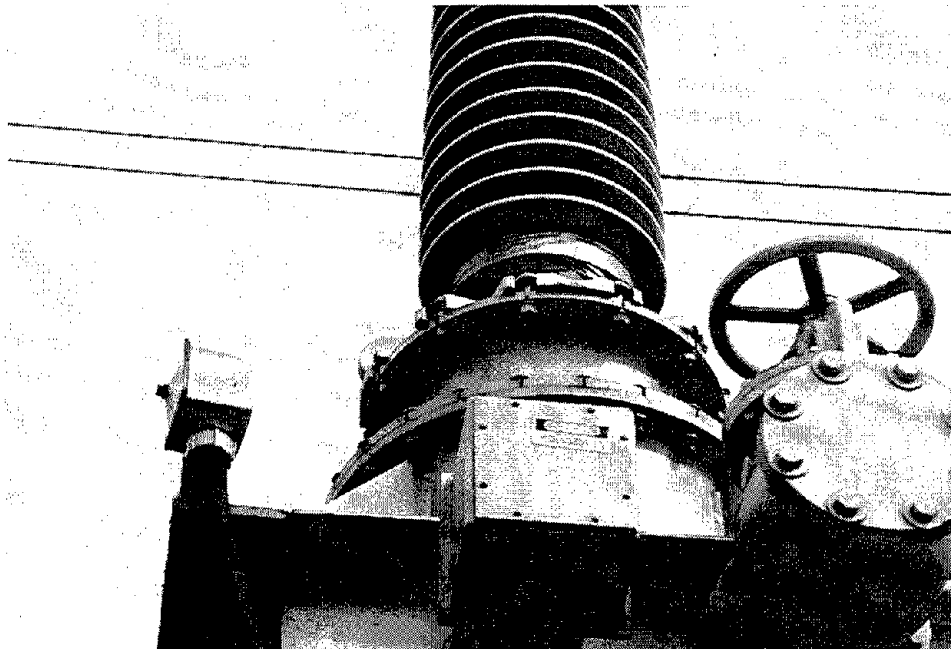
Transformer bushing with porcelain slipped relative to its mounting flange.
